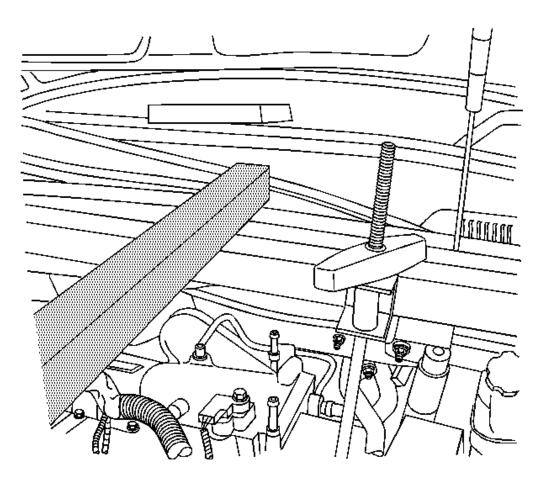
Identifying Special Tools - J 36462-1A & J 28467-51 Courtesy of GENERAL MOTORS CORP.
